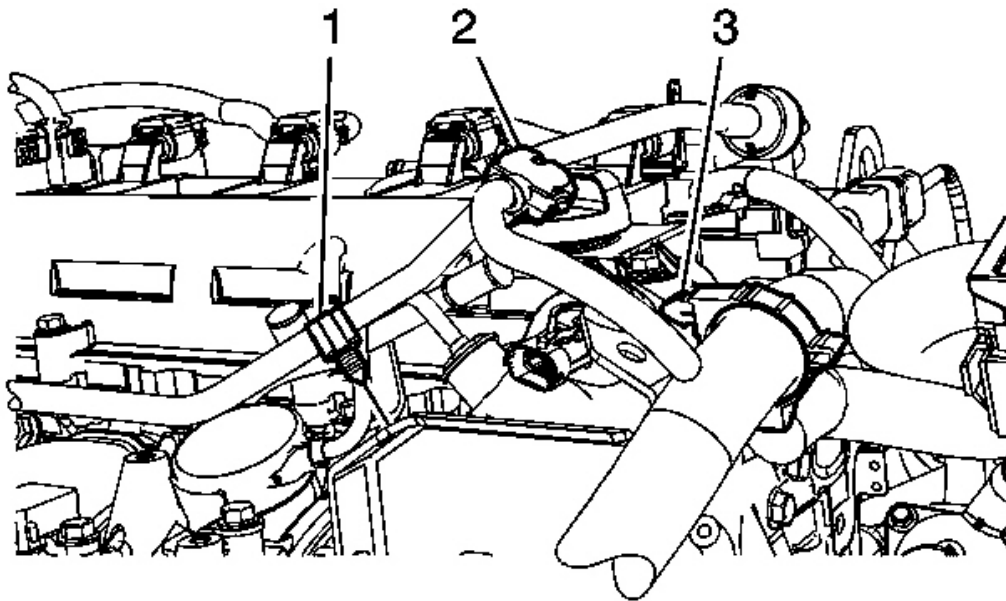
Identifying High Pressure Fuel Pump Electrical Harness & Connector
